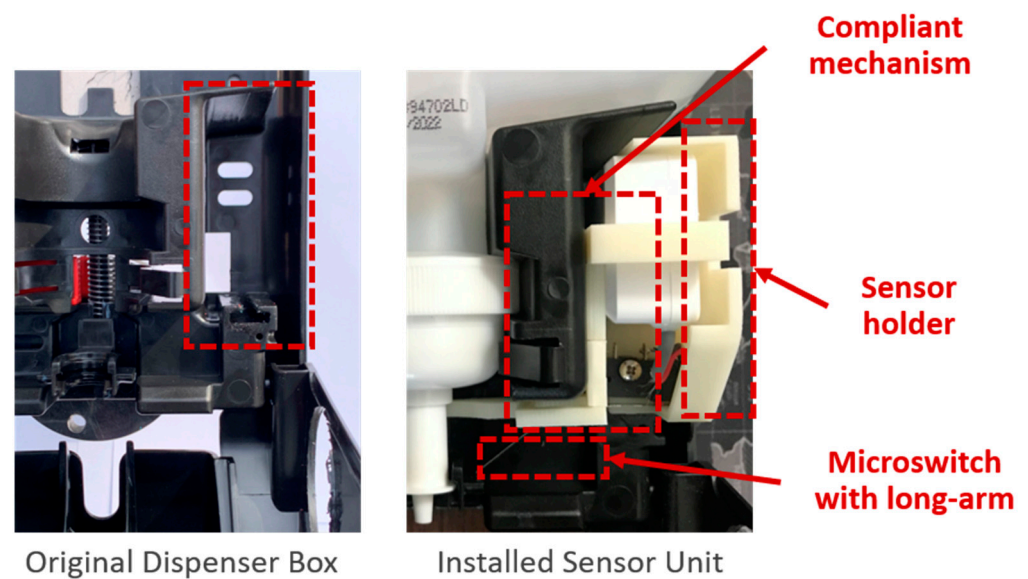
Sensor holder design for “plug-and-play” deployment in existing dispensers.
